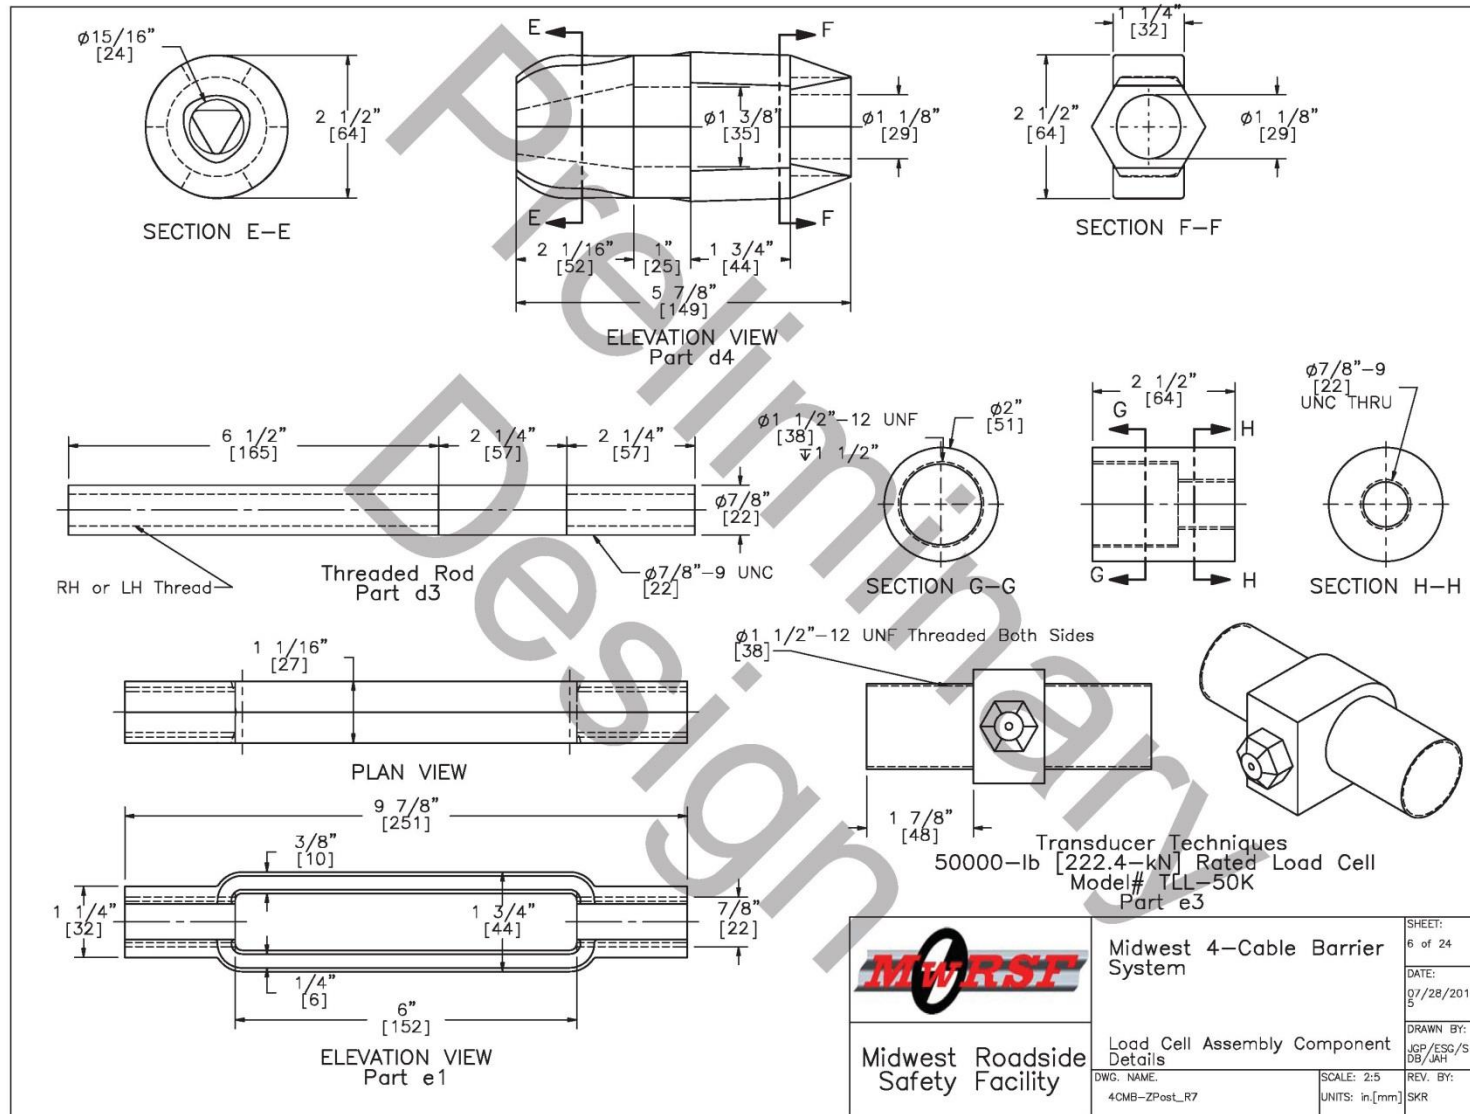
Load Cell Assembly Component Details, Test No. MWP-1
